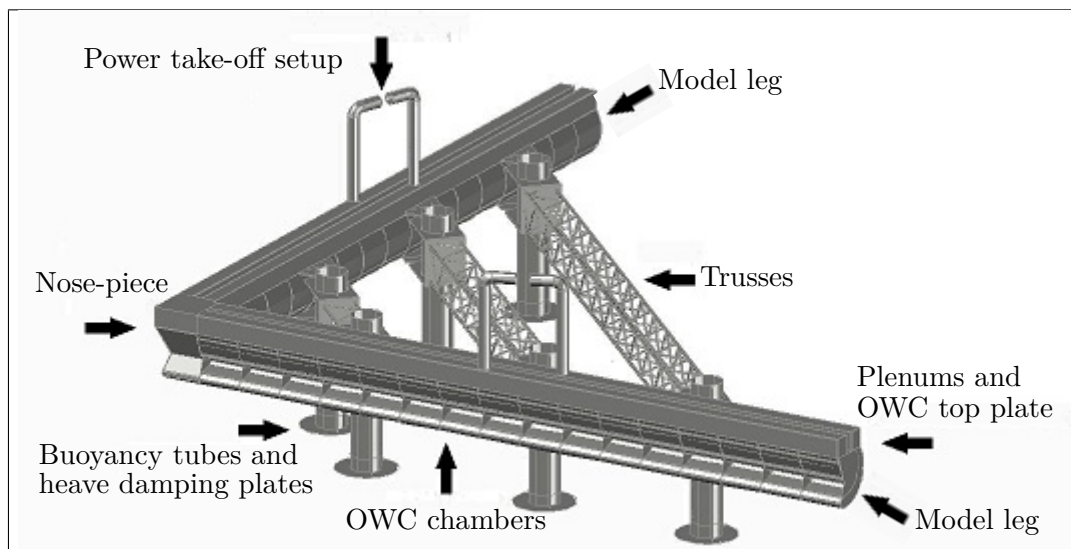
3-dimensional CAD drawing of the 32-OWC chamber stainless steel model.
